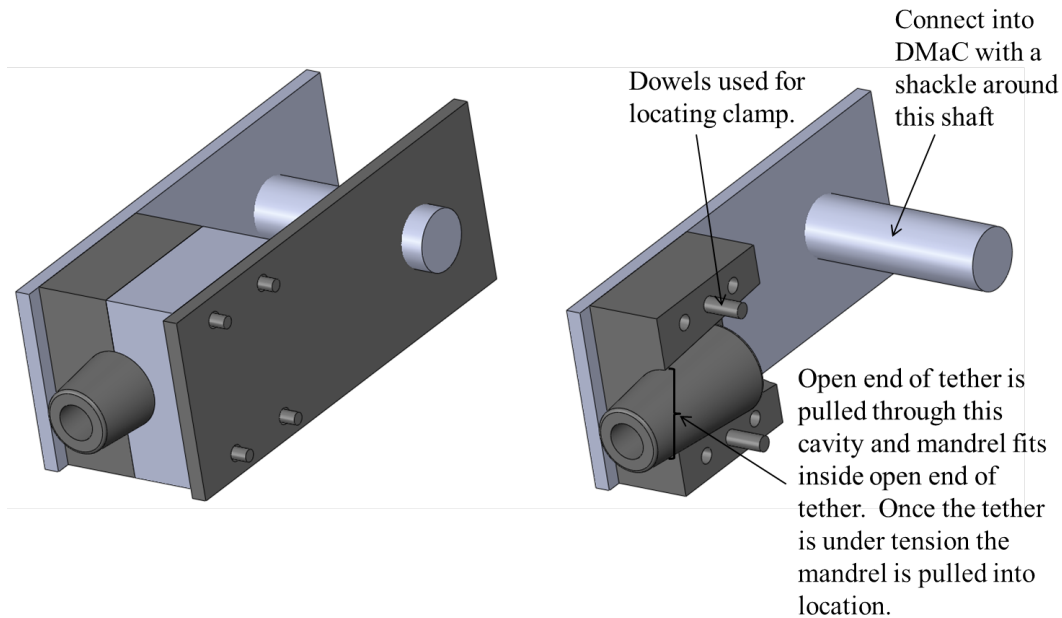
Rope collet design. Left image details the complete assembly; right image details cut away view. The design allowed the empty end of the tether to be pulled through the clamp with the mandrel then fitted into the open end of the tether. Once the tether was put under load the mandrel was then pulled into location within the collet and held the tether firmly in place. Note the entire assembly was manufactured from bright mild steel. Different colours have been used in this assembly visualisation to clearly define different components of the assembly.
